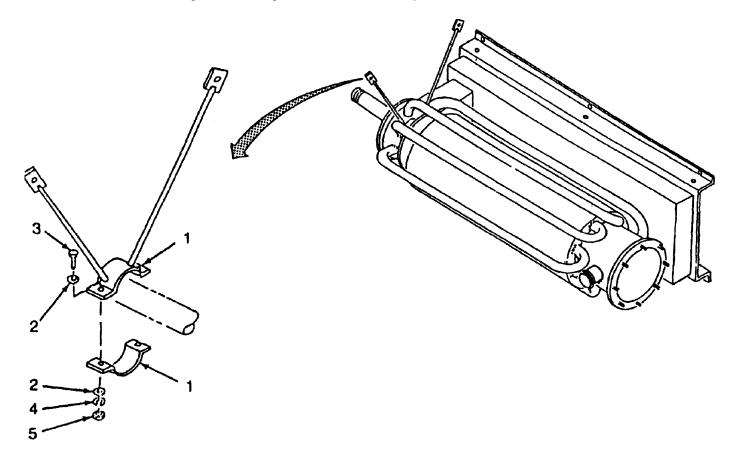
Heat Exchanger, (Model H120) Assembly
